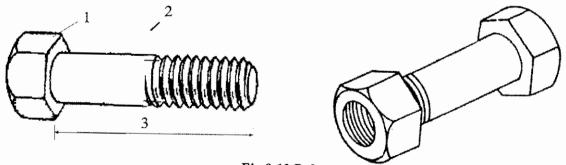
Bolt 1. Head 2. Shank 3. Length of the bolt
